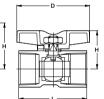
Fig. TKT • Threaded end to BS21 • Threaded end to BS21
